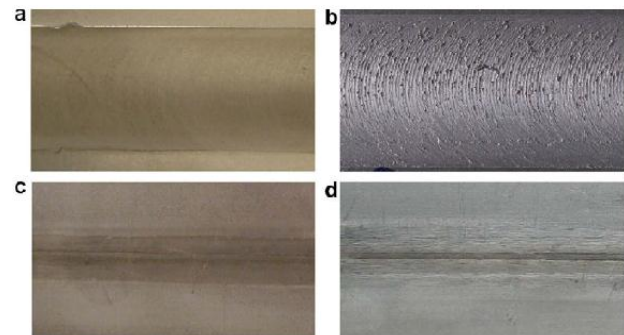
Crown (a) and route (b) views of the welds HW and CW (c, d) (Rodrigues et al., 2009).
